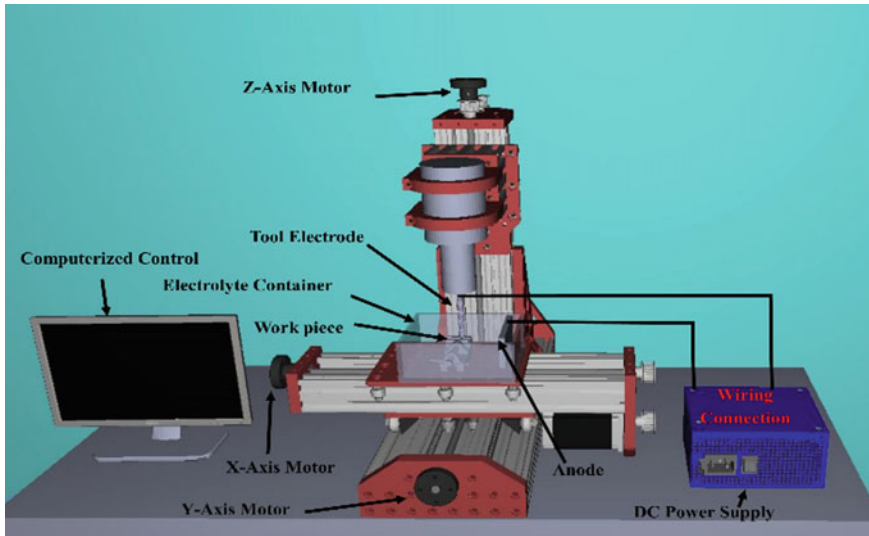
Schematic of ECDM set-up installed on CNC machine
